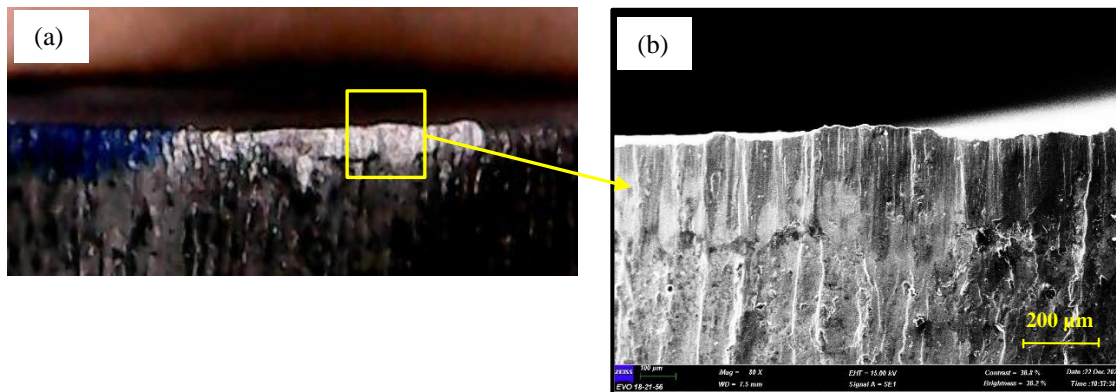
(a) Flank wear observation at the cutting speed of 350 m/min. (b) Indication of chip weld formations on the cutting edge of 22MnB5
